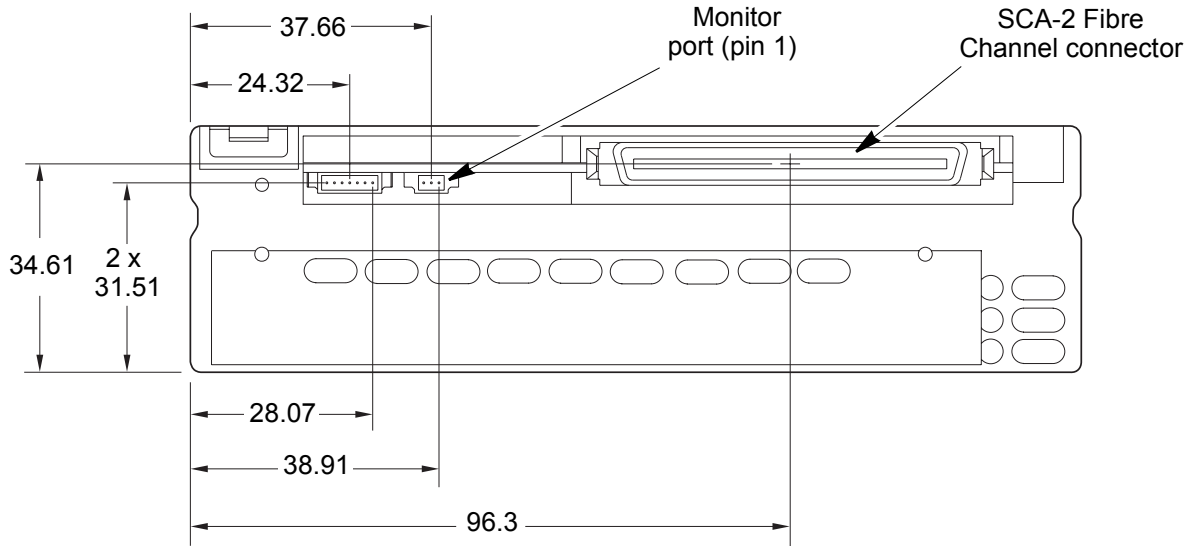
Fibre Channel tape drive back-panel connector locations (in millimeters)
